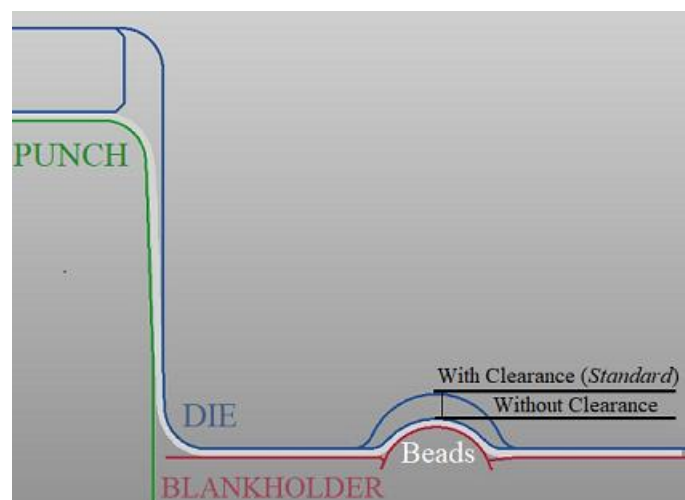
Section cuts of tools in initial position: drawbead channel with clearance (Original CAD); drawbead channel without clearance (Modified CAD) [63].
